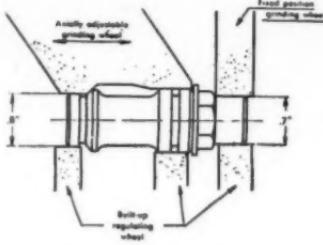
Here is a combination of multiple on formed wheels grinding three diameters, one taper and one shoulder by the infeed method on a Lidkoping machine. All surfaces must be dead concentric and tolerances are .0008". Production is 80-100 per hour.
